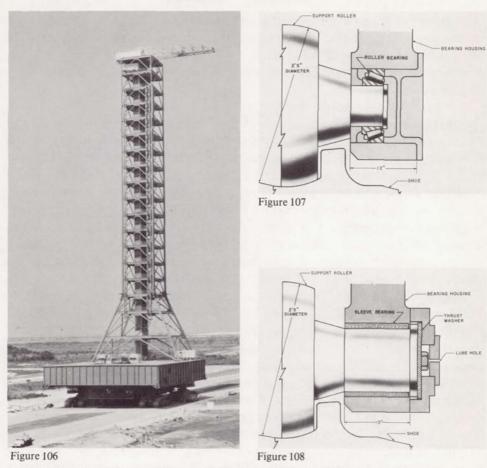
Crawler carrying a mobile launcher 24 July 1965, the day the bearing trouble was discovered. Fig. 107. The original design, which failed in early tests of the crawler. Fig. 108. The sleeve bearing, which solved the problem.
